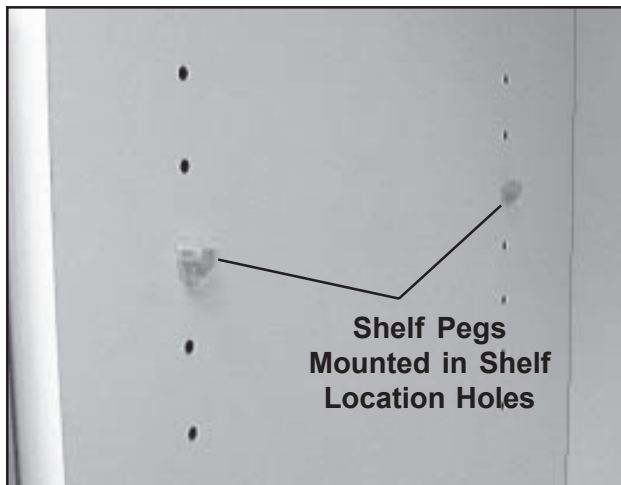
Shelf Pegs Mounted in Cupboard Wall
